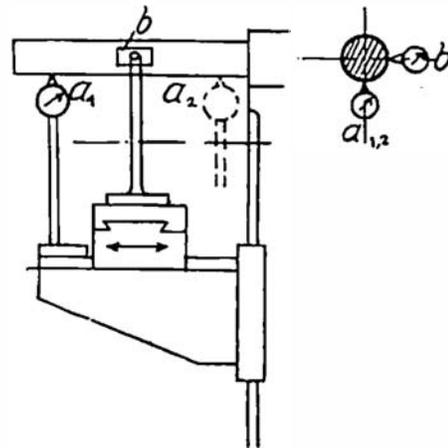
Checking the Parallelism of Overarm with Transverse Movement
